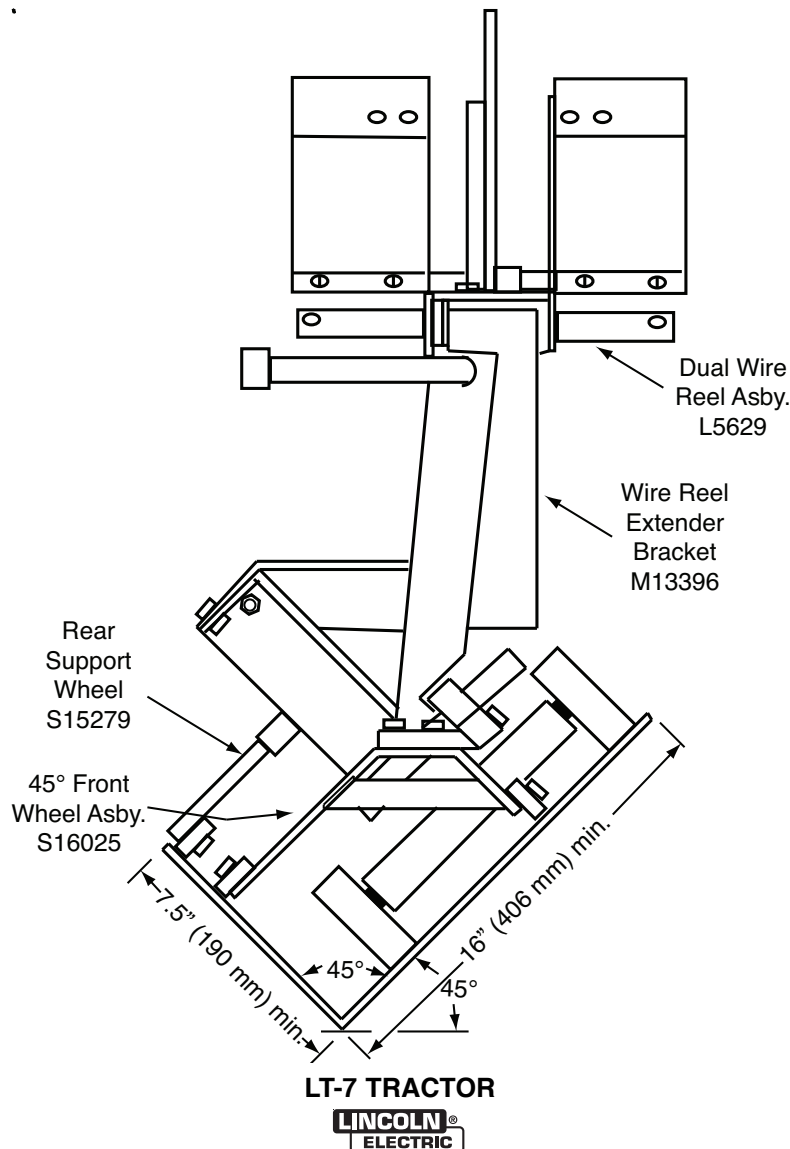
TINY TWINARC® FLAT FILLET FINAL ASSEMBLY
